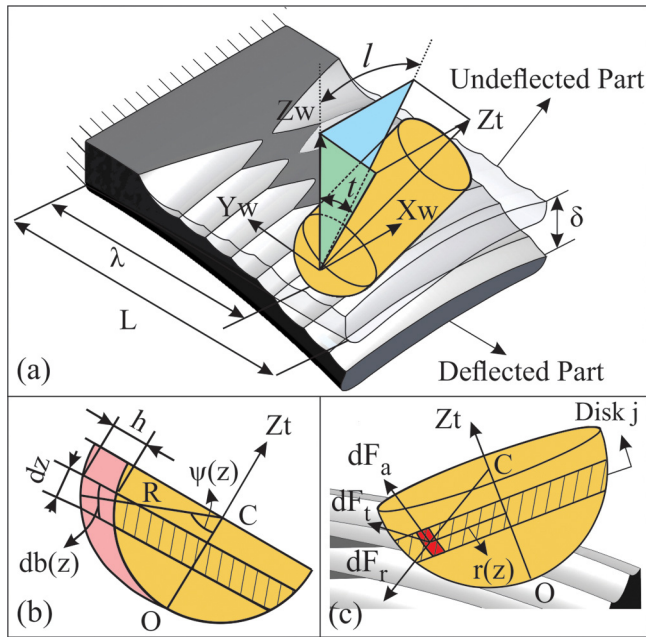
(a) Tool posture in 5-axis ball-end milling of a flexible part, (b) Instantaneous chip thickness, (c) Differential force components.
